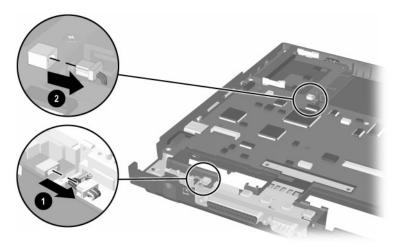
Disconnecting the External Battery Terminal and Speaker Cables from the System Board
